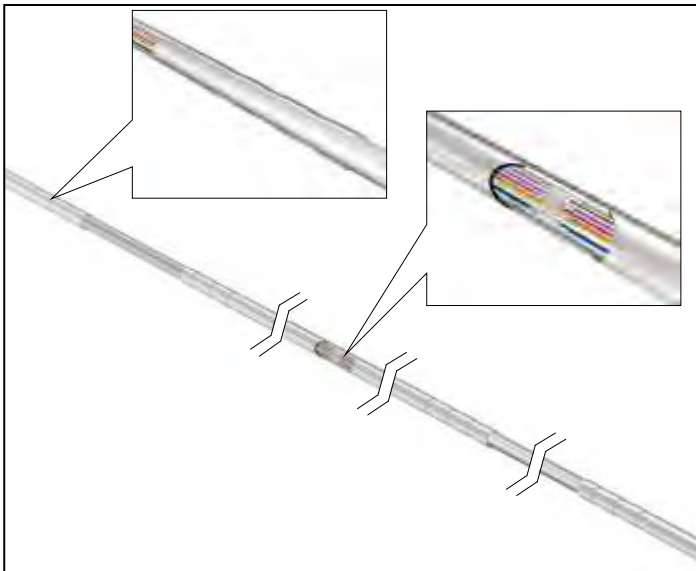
Steel tube splicing principles. Figure shows two steel tubes with fibres spliced together by means of cold welding/crimping technique utilising a combination of inner and outer splicing tubes.
